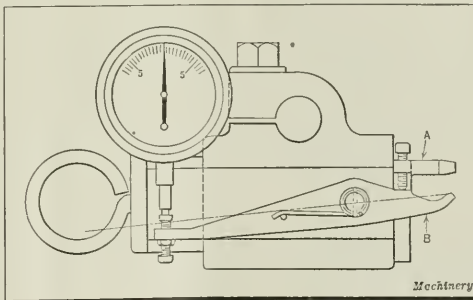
Diagrammatic Representation of Fixture employed in Fig. 2
